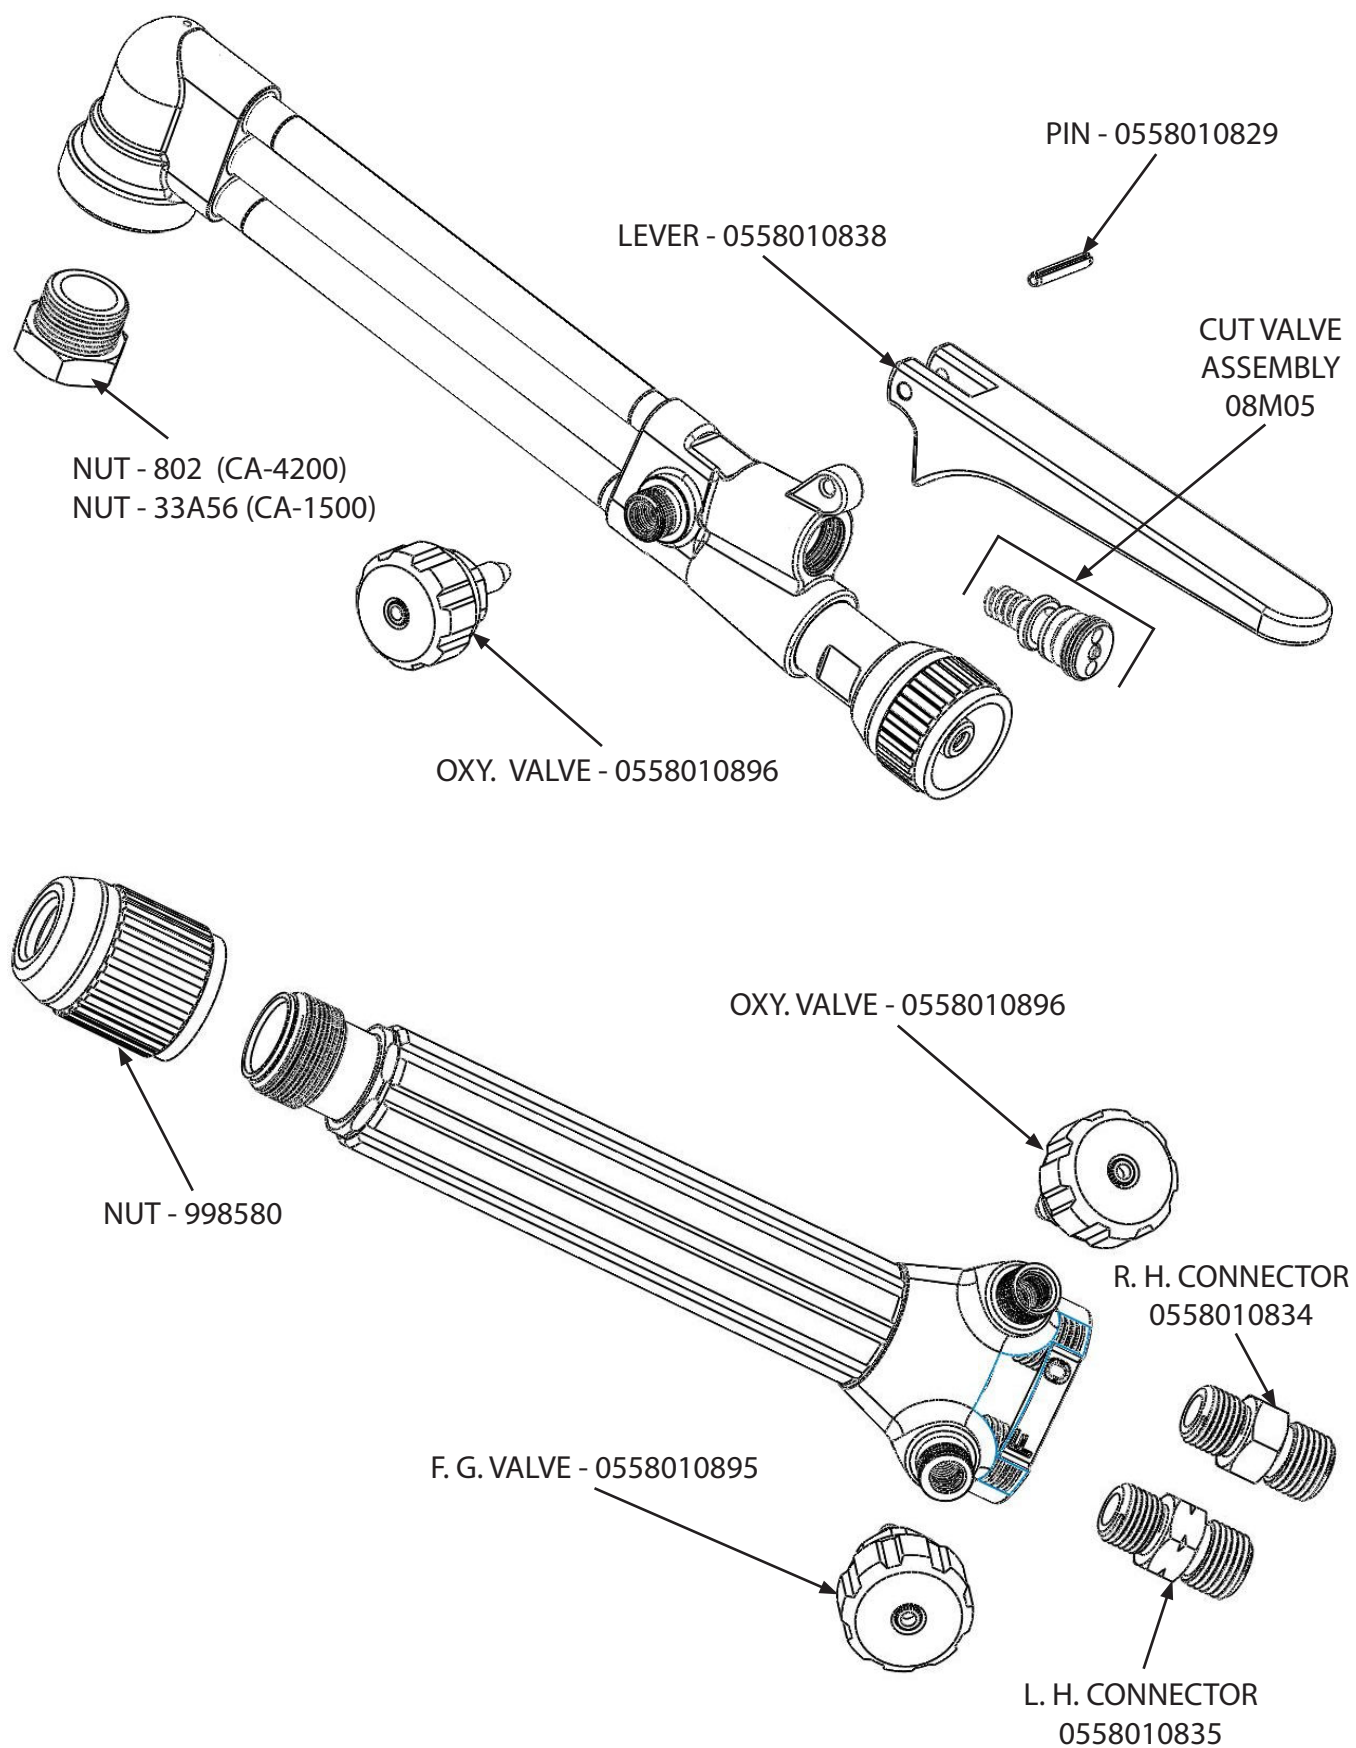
Replacement Parts - Welding Torch and Cutting Attachment Assemblies
